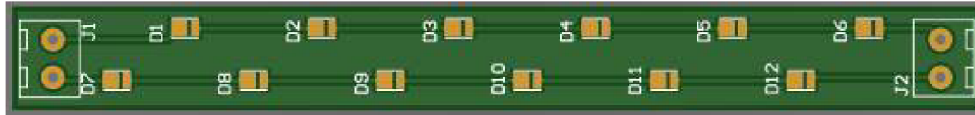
PCB of single light panel sized  $130 \times 15$  mm.
